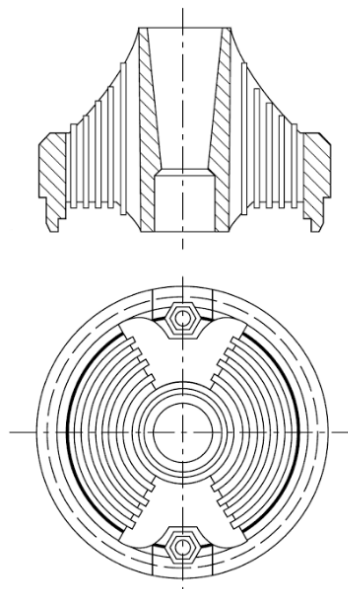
Section and elevation of a cylindrical rubber-metal guide [2, p. 58]
